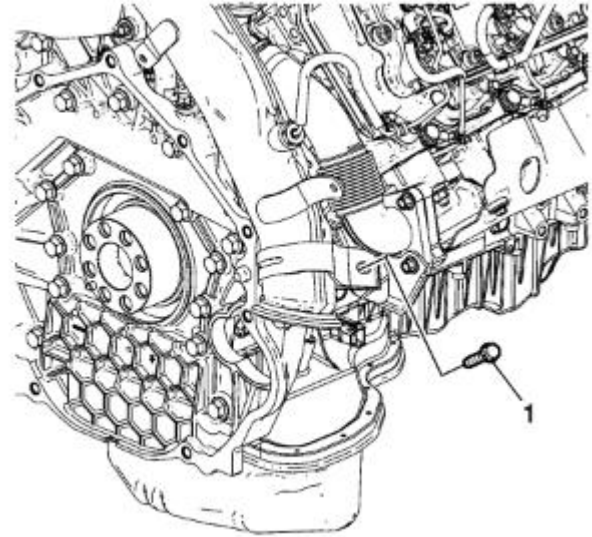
Exhaust adapter to passenger side exhaust bracket bolt installation
